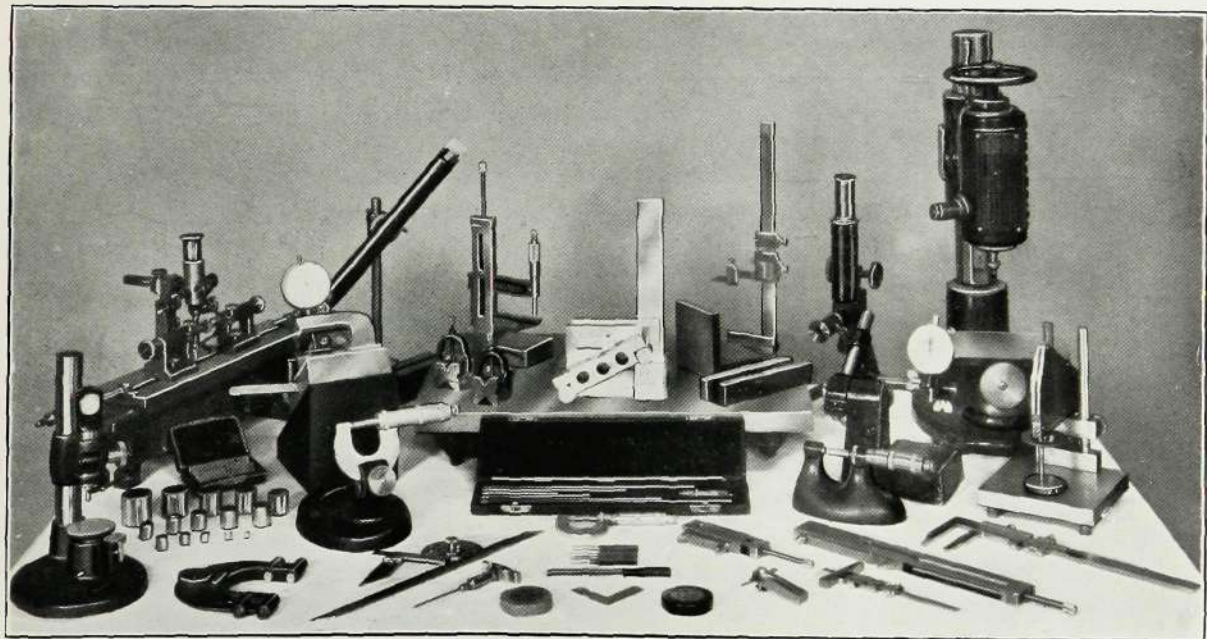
A few of the Necessary Instruments used for Tool Inspection
